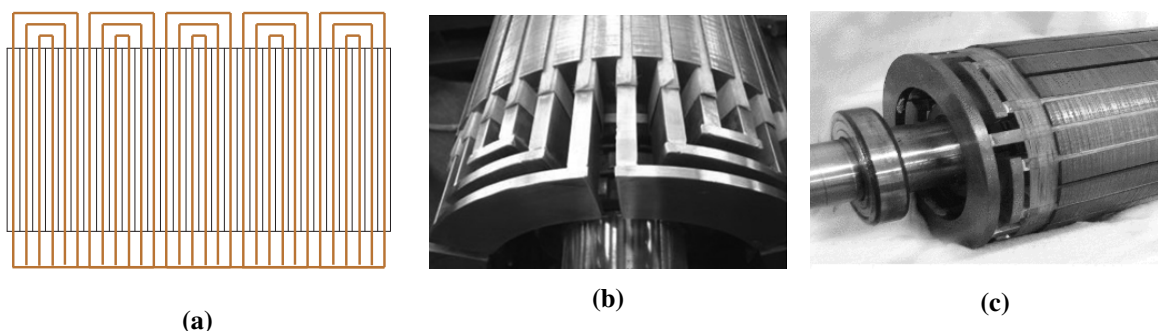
(a) NL rotor winding arrangement, (b) NL rotor prototype [9], (c) cage+NL rotor prototype [19].
